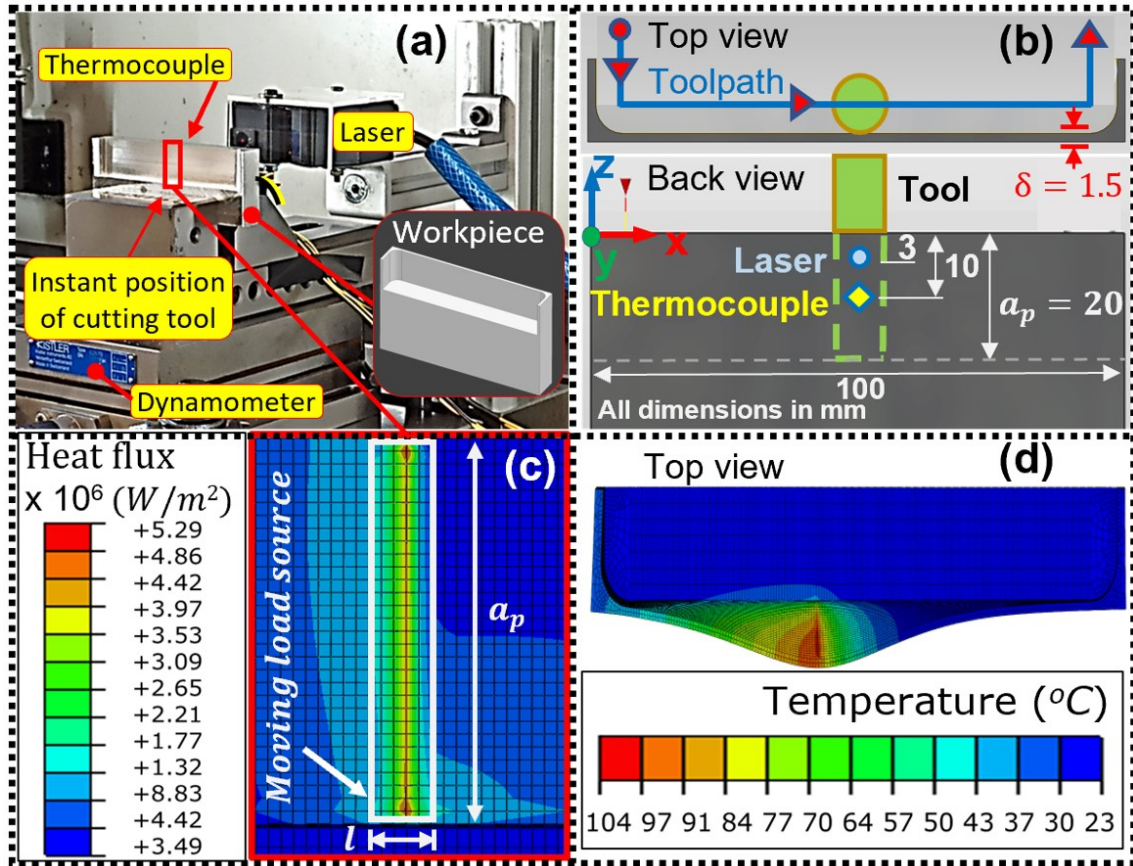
(a) Load calibration setup (b) Sensor layout in Back view and Toolpath in the top view (c) Front view shows the application of moving heat load in the FEM model (d) Resulting temperature and deflection in Top view.
